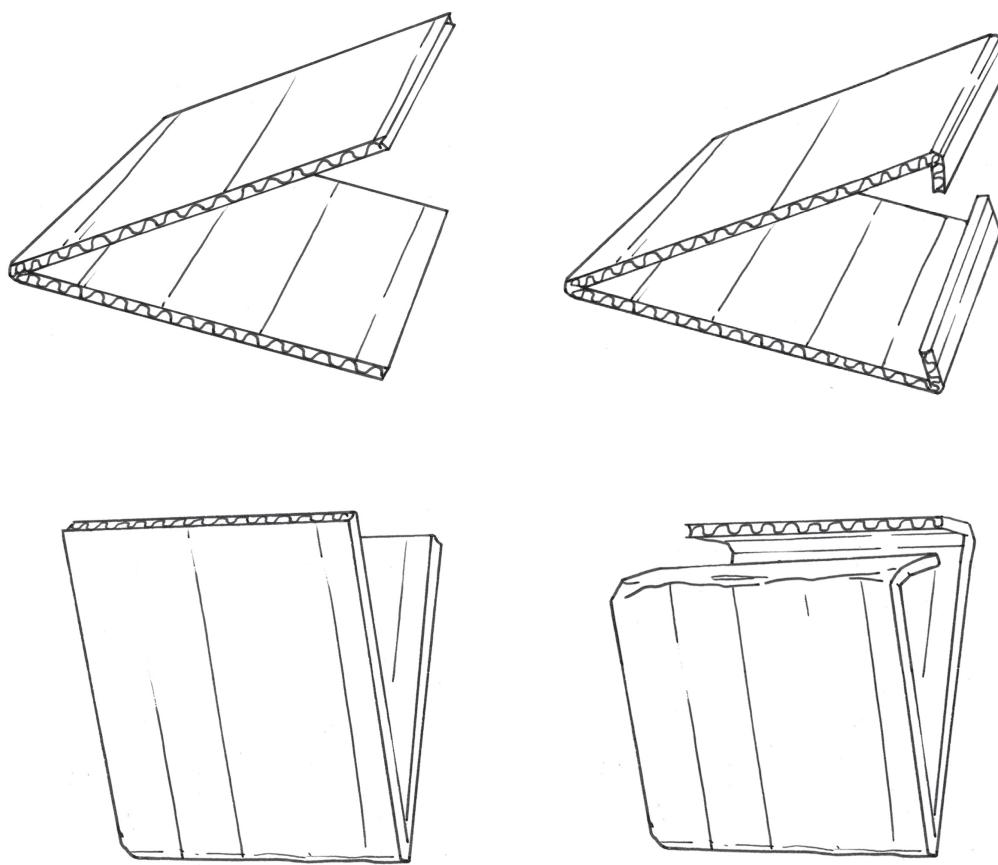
Both pieces are folded in the middle to form springs. The edges are folded to form flanges.
